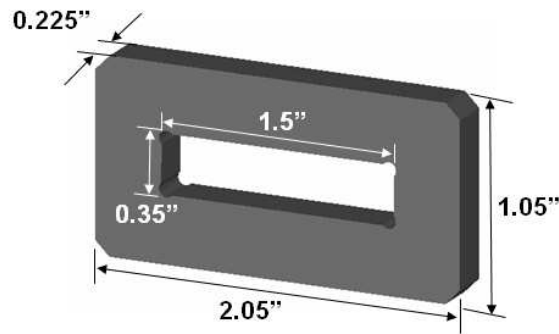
The dimension of the core used in creating a tube-type transformer.
